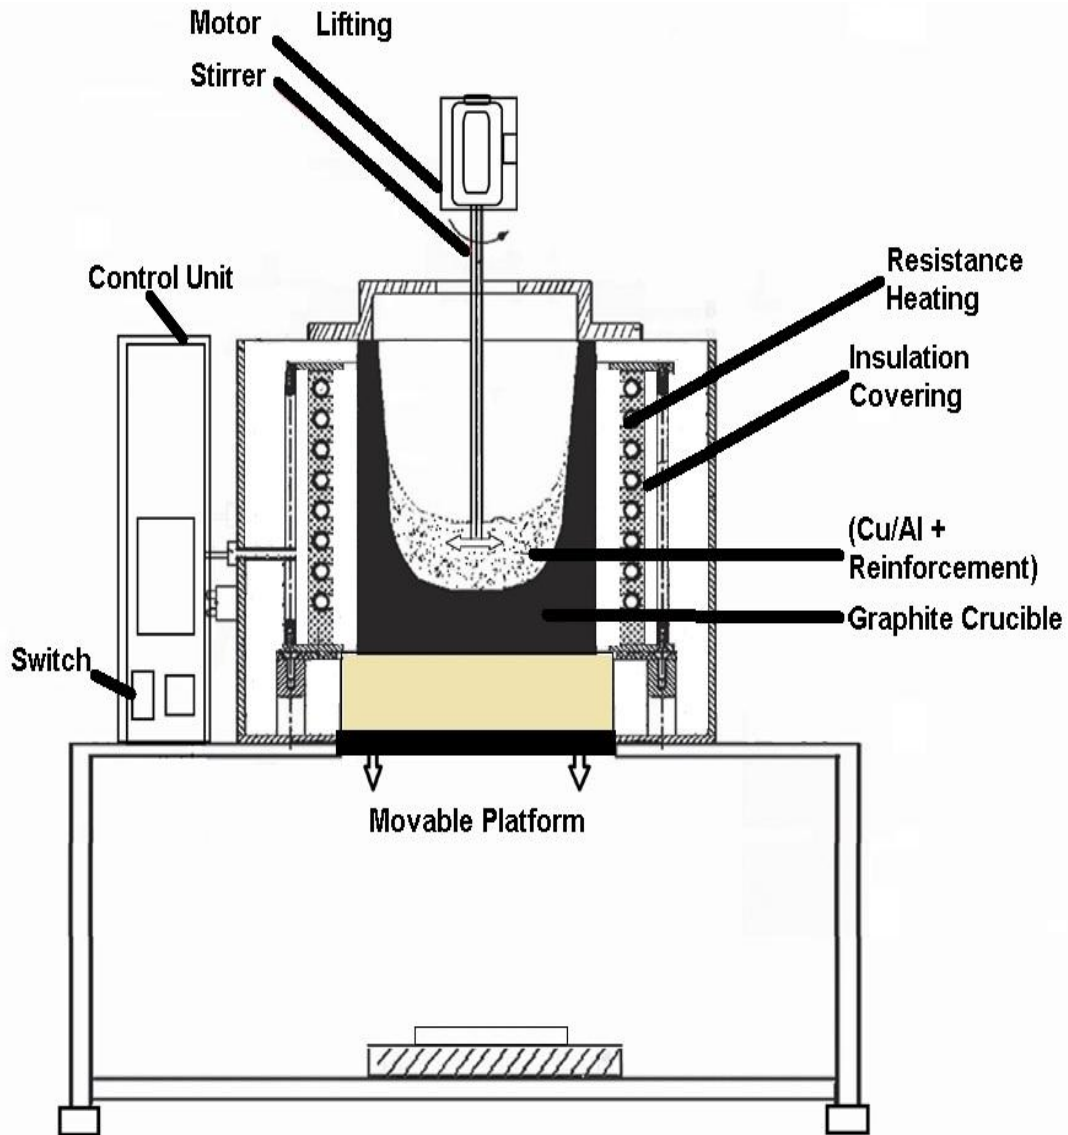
Stir casting setup used for melting the fabrication of materials
